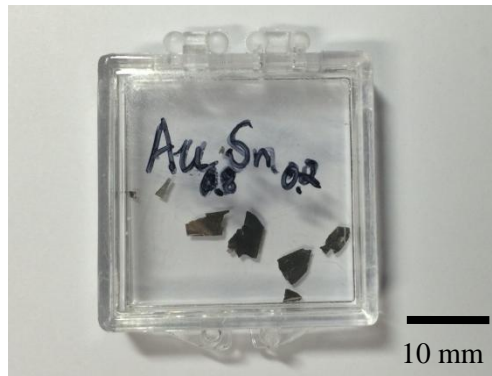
$Au_{0.8}Sn_{0.2}$  soldering foil pieces for test sample.
